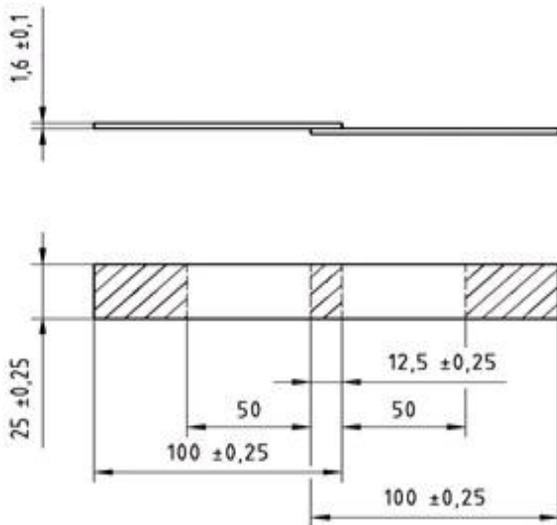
Configuration and dimensions of lap shear bonded specimens
